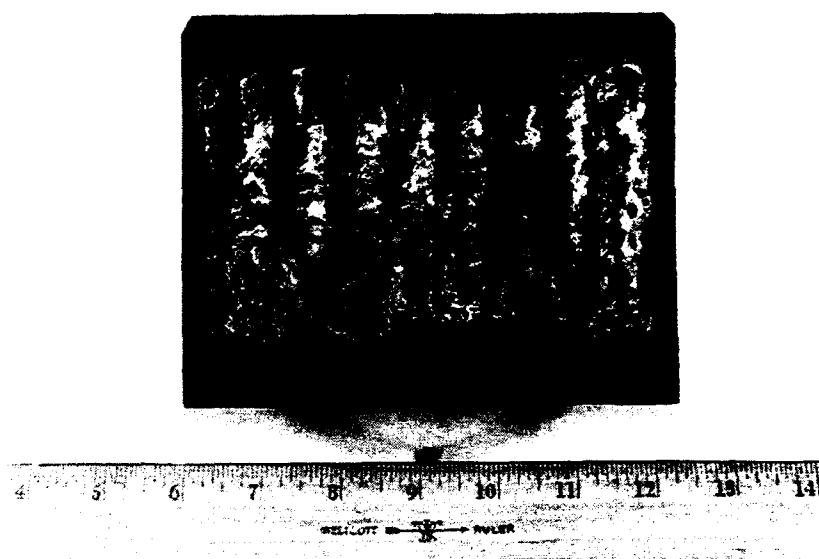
MIG as-welded 4 x 5 x 8-inch test specimen showing rough deposits.
